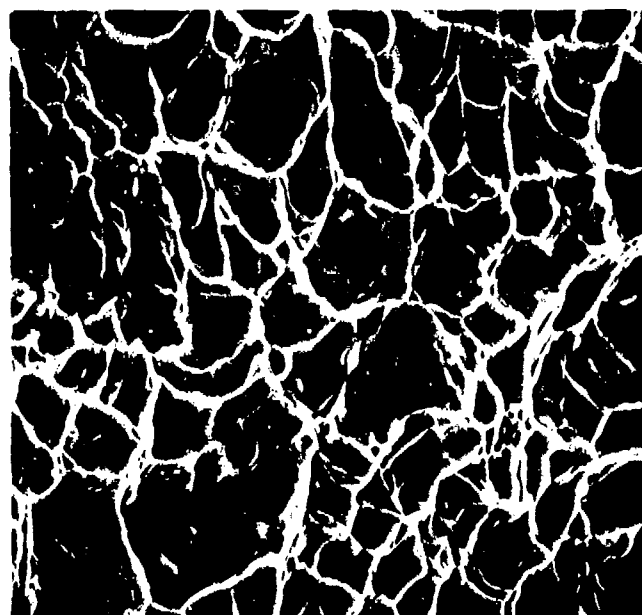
Tensile overload region of the fracture surface of A-514 weldment containing porosity, 3500x.
